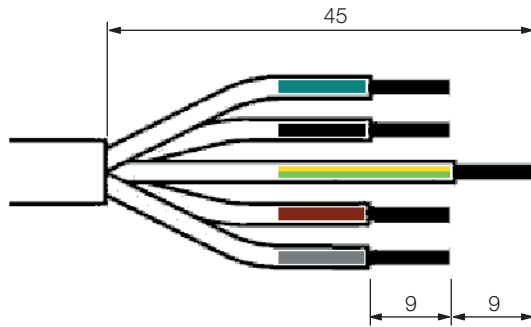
Dimensions for removing the rubber sheathing and insulation
